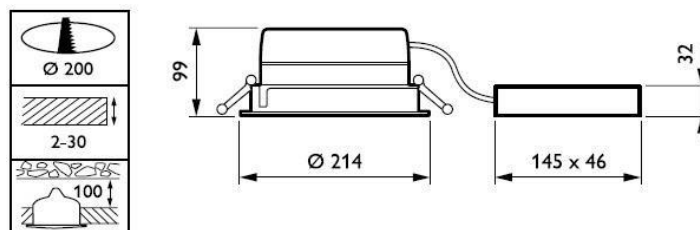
Dimension Drawing of Luxspace2 Compact Low Height
